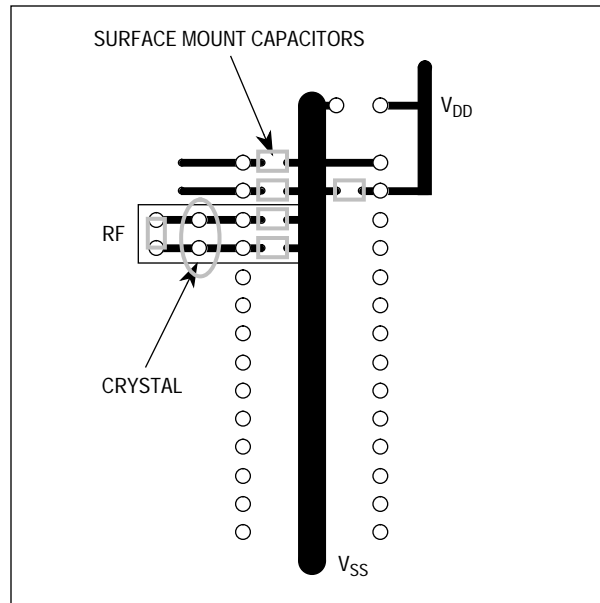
Typical Oscillator PCB Layout for MC68HC05P3
